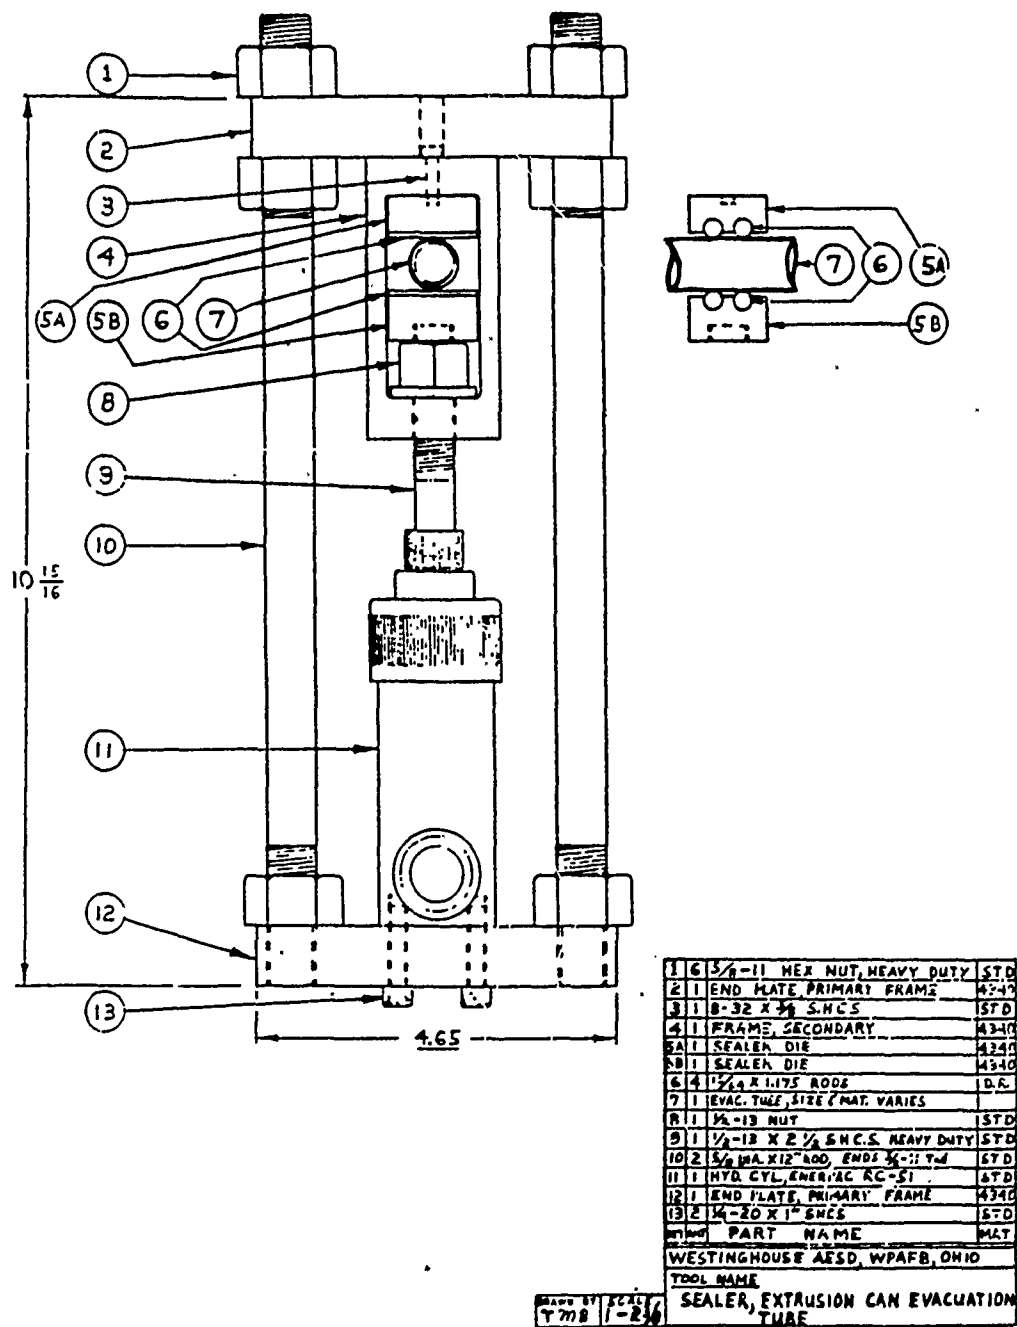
Sealer, Extrusion Can Evacuation Tube.
